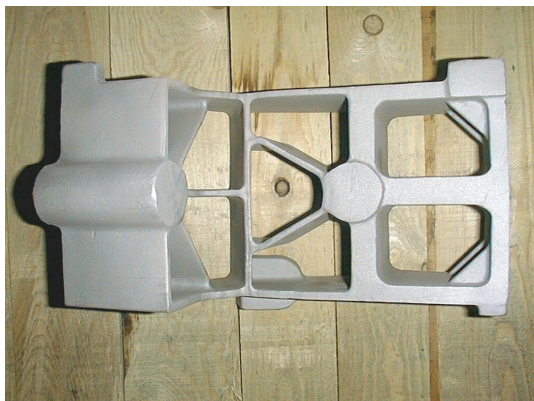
Vacuum castem and Hipped prototype of an Inconel 625 divertor carrier.
